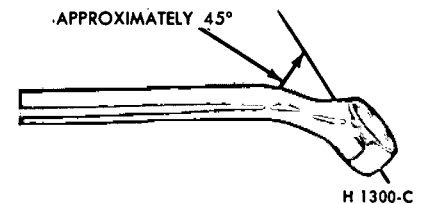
Wrench for Bleeding Brake Hydraulic System
